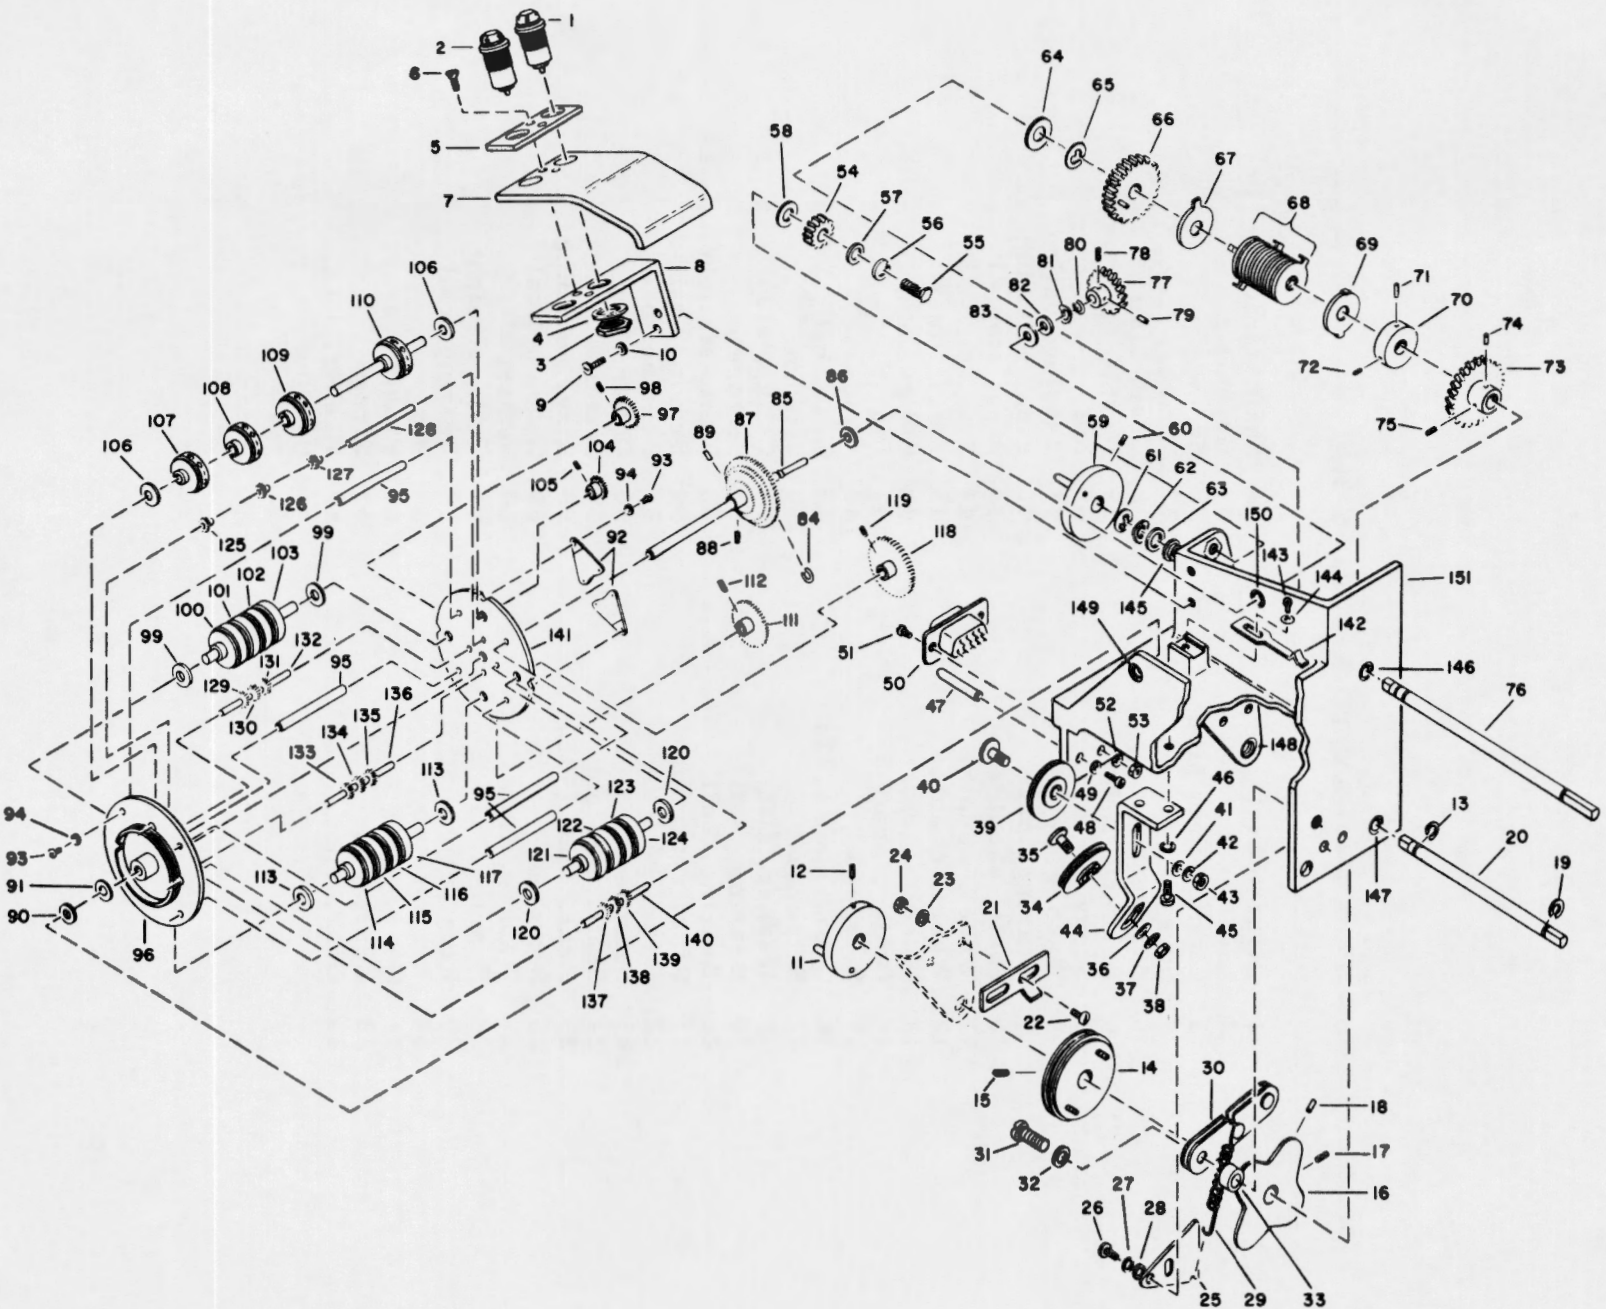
Main Tuning Module A1A15, Exploded View of Counter
